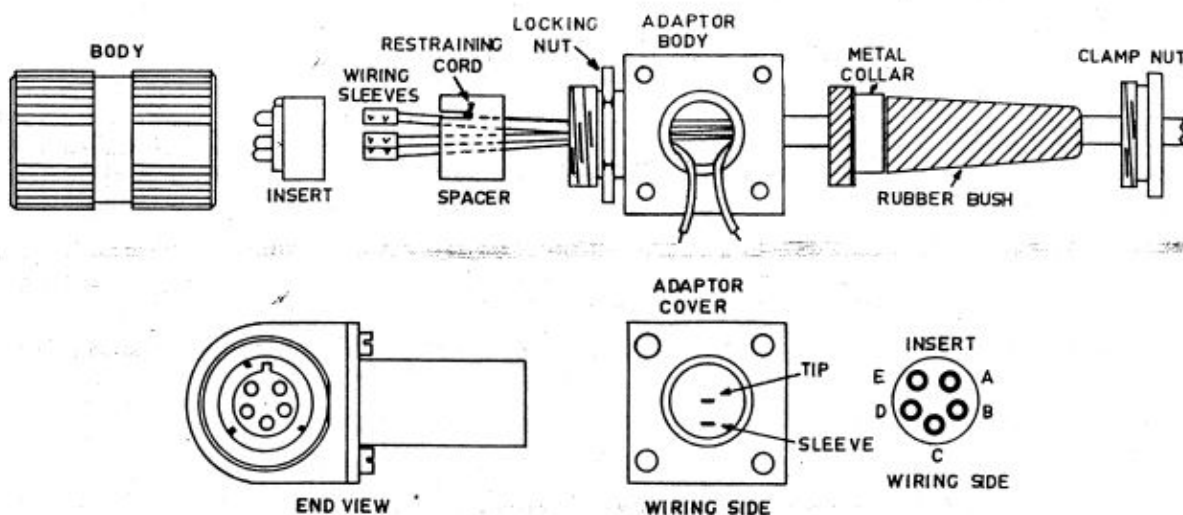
FIVE PIN PLUG WITH ADAPTOR
